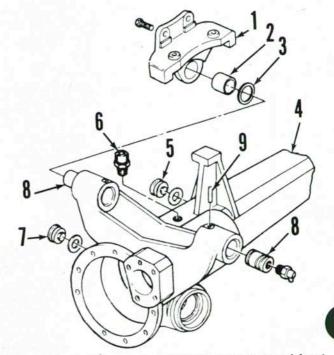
Exploded view of front pivot support and front wheel drive axle housing typical of APL-345 and APL-355 axles used on TW-5, TW-15 and TW-25 tractors.
